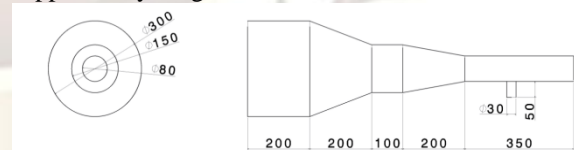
Geometry of reducer section (All dimensions in millimeter).
